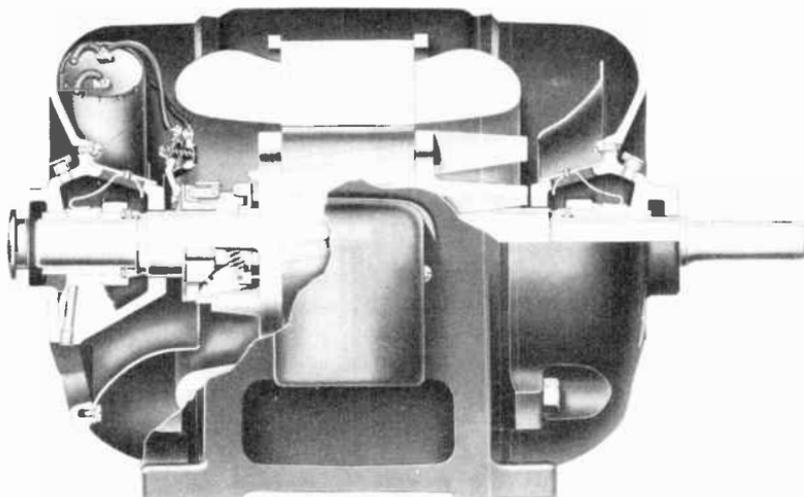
Cutaway view of a single-phase capacitor motor. (Courtesy of General Electric Co.)
